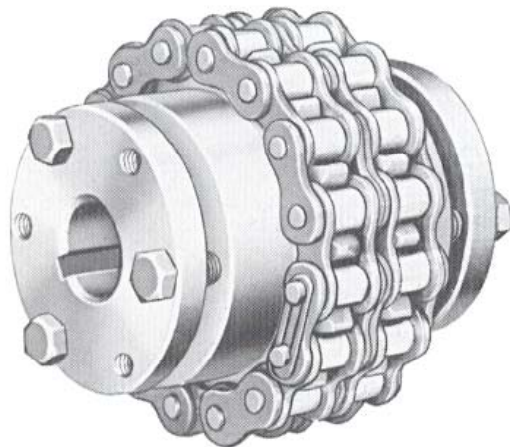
Chain coupling. Torque is transmitted through a double roller chain. Clearances between the chain and the sprocket teeth on the two coupling halves accommodate misalignment. (Emerson Power Transmission Corporation, Ithaca, NY)
